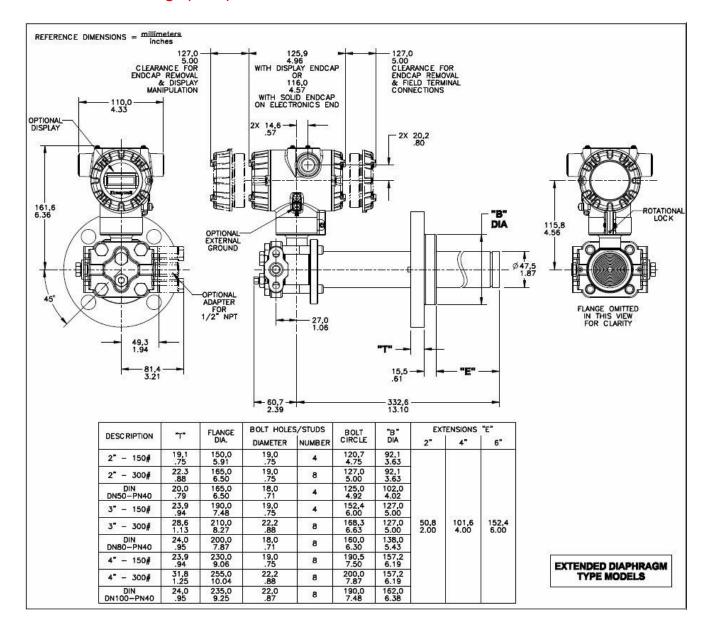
Typical mounting dimensions for extended diaphragm type models STF728 and STF732.
